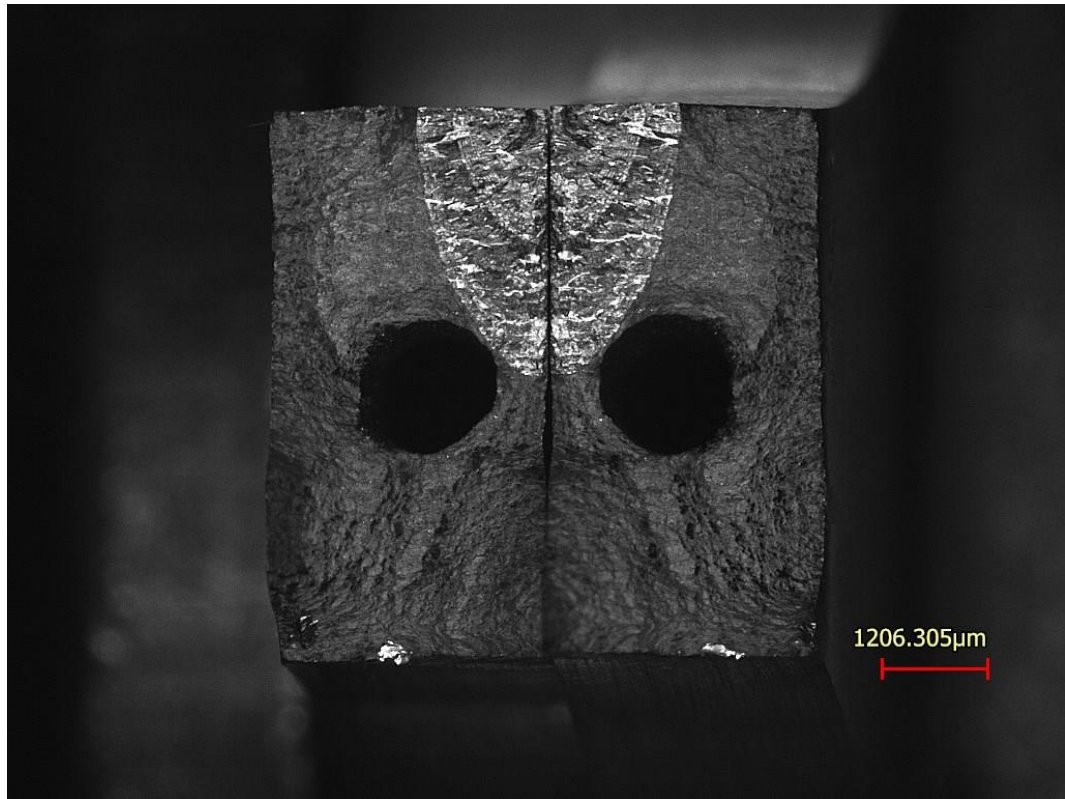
Specimen D3 fracture surface (300,000 cycles : 73.27 ksi / 505.2 MPa)
